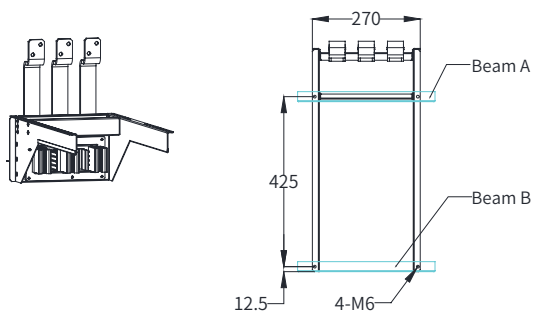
Mounting the upper part of the T2 quick mounting kit
